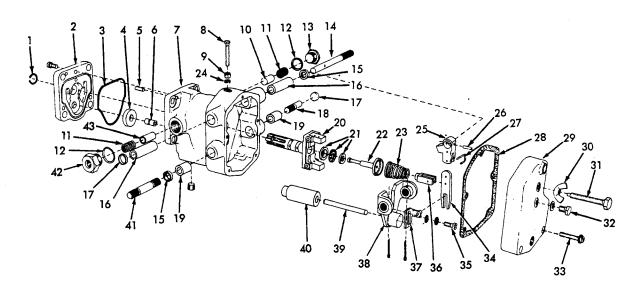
Travel Speed Governor Parts (T-70864)
